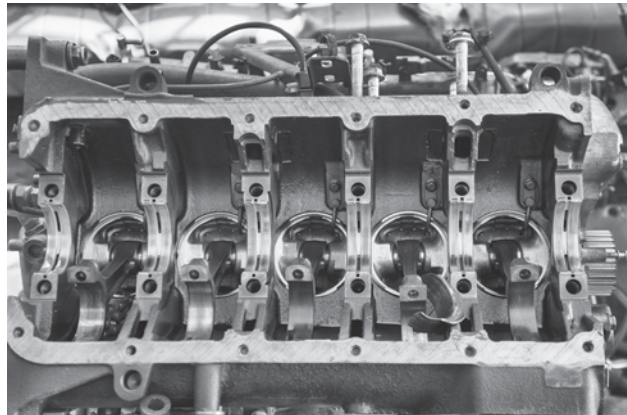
Bottom view of the crankcase of a V-6 engine
